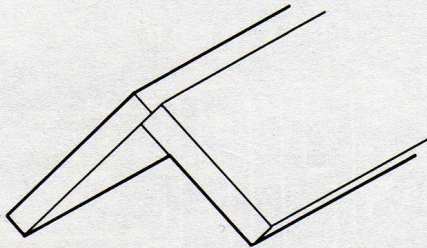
Half open corner joint. Penetration quite difficult. May require welding in the inside for full strength.
